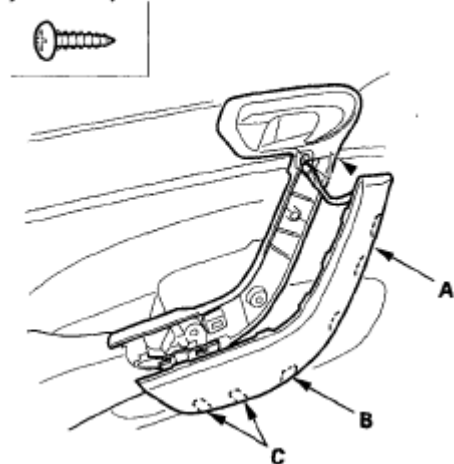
Releasing Hooks Prying Bottom Edge Of Grip Cover
